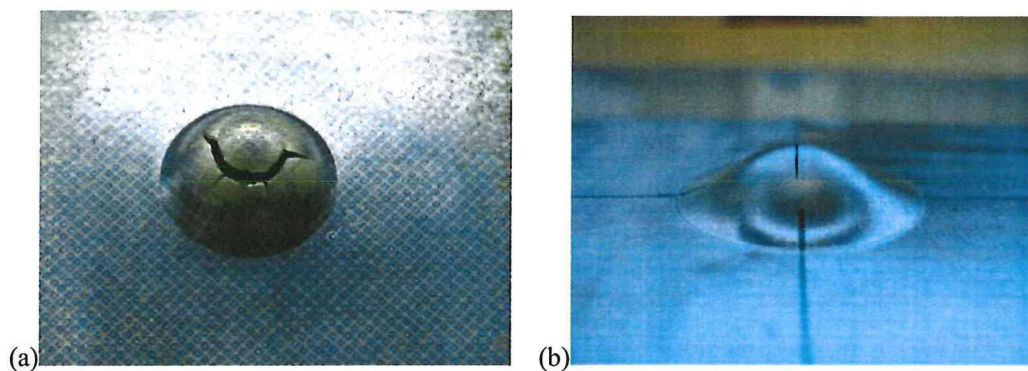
Failing of (a) a normal plate, the crack is circular (b) a bad weld, with a failure along the weld line
